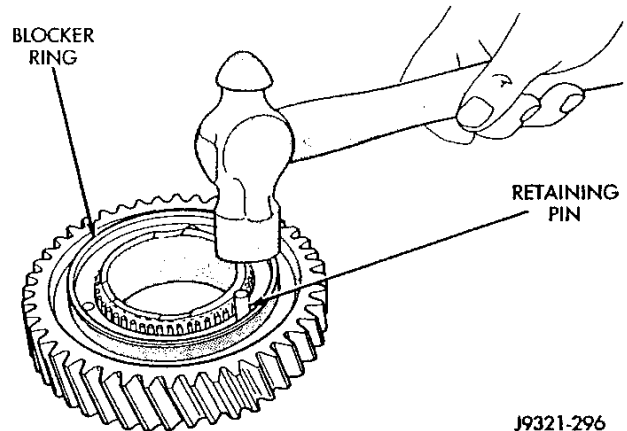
Starting Roll Pins In First/Second Gear Blocker Rings
